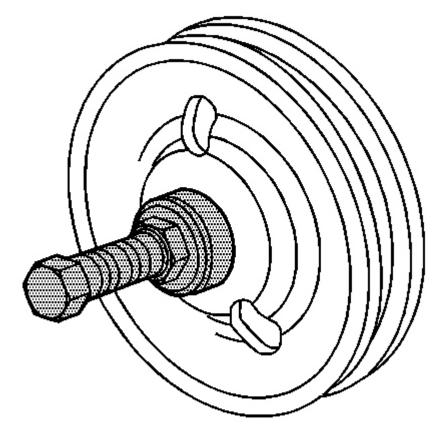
View Of Power Steering Pump Pulley Installer Courtesy of GENERAL MOTORS CORP.
